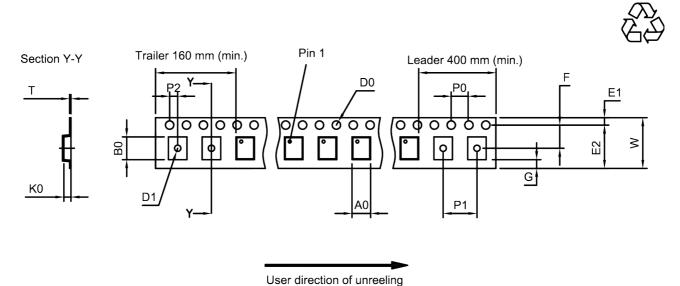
Drawing of tape (first-angle projection) with tape dimensions according to Table 1.
